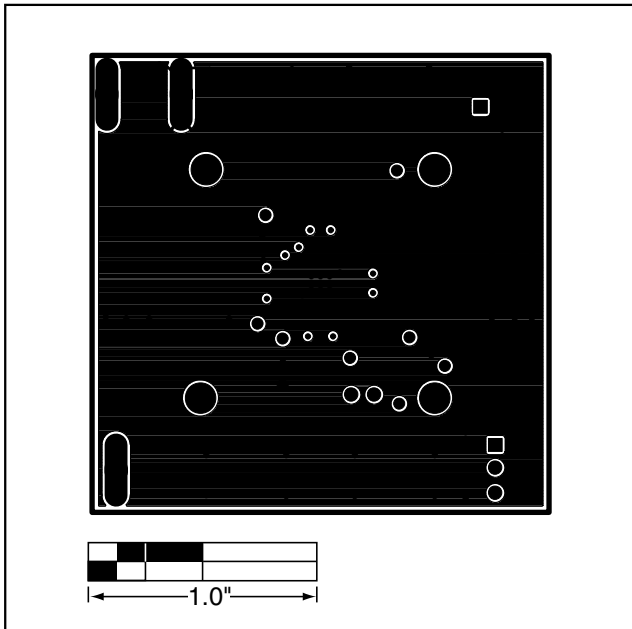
MAX3800 EV Kit PC Board Layout—Ground Plane
